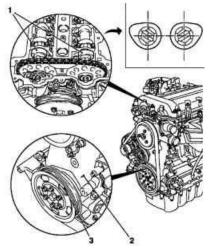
Install the crankshaft position at top dead center (TDC), piston cylinder number 1: 1 - cams cylinder number 1, 2 - lug 3 - Tag
